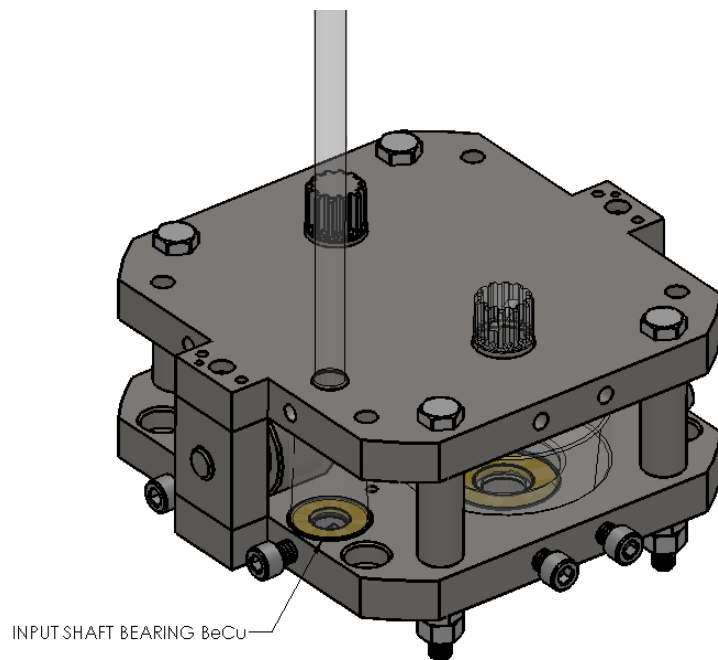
Gear assembly with the illustration of the BeCu shims.
